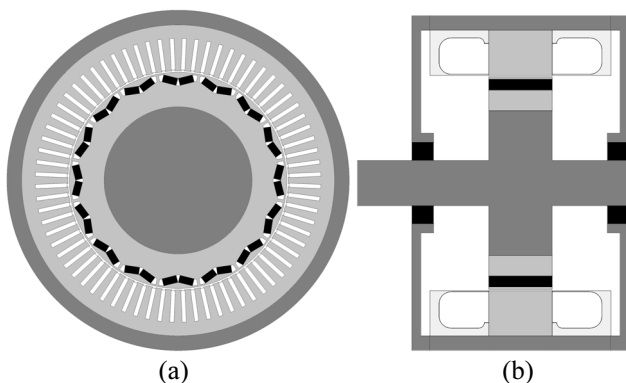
Radial (a) and axial (b) view of the complete machine assembly
